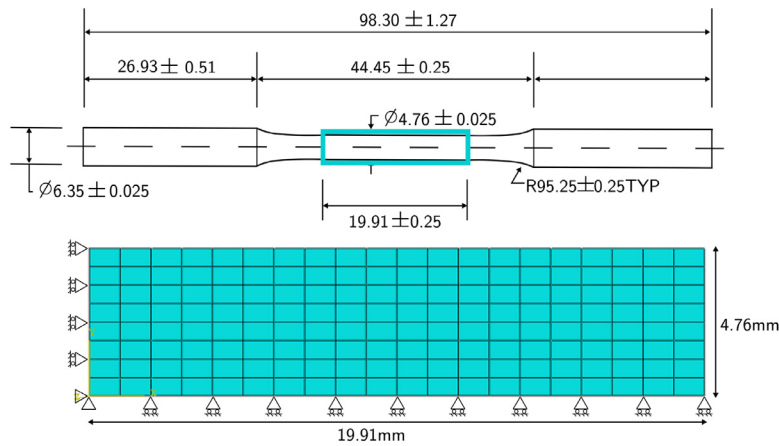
Reverse yield test specimen (all dimensions in mm) [59].
